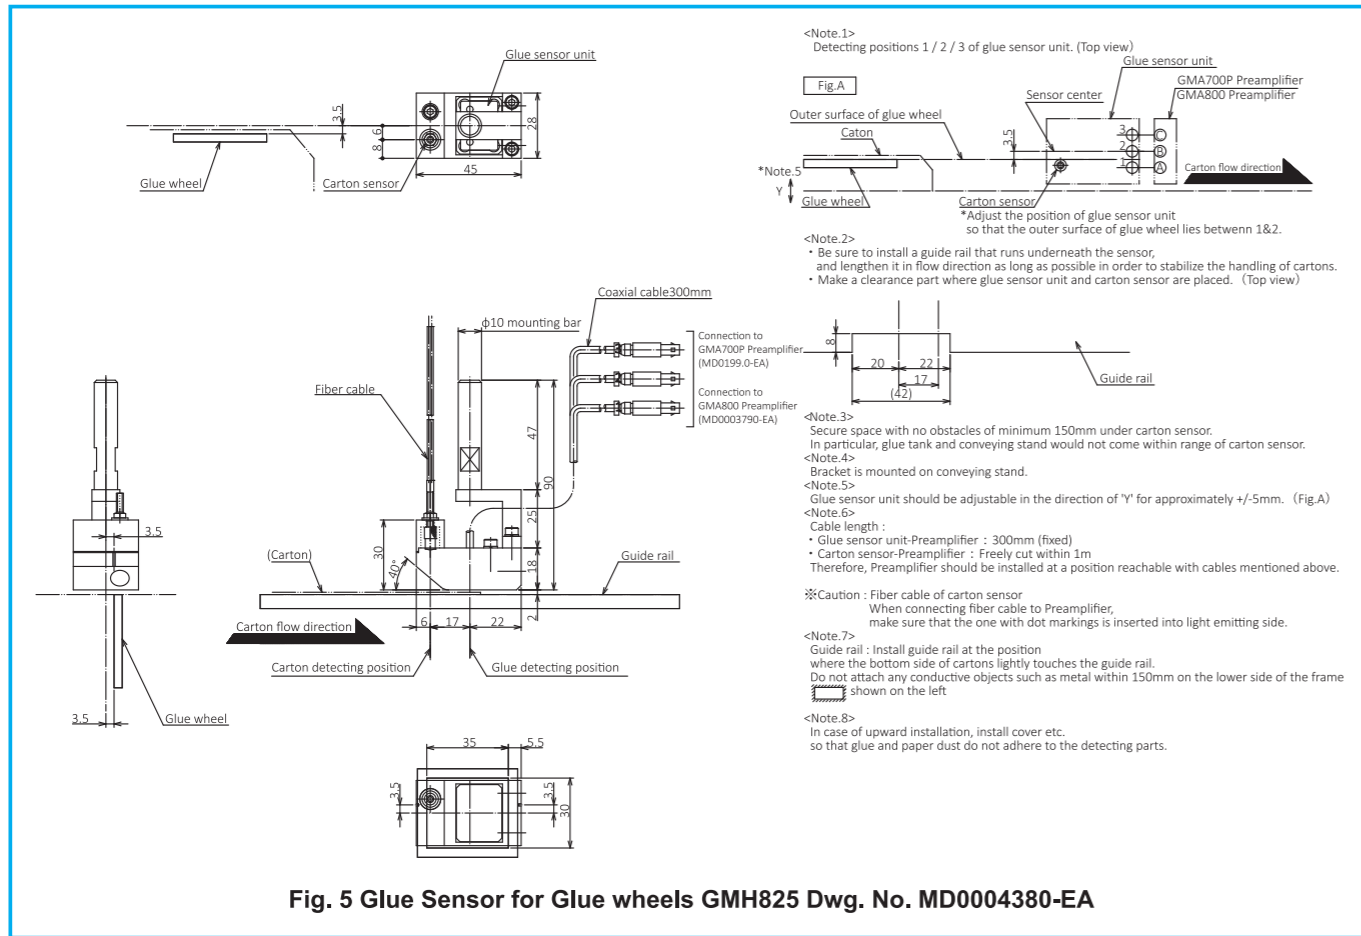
Glue Sensor for Glue wheels GMH825 Dwg. No. MD0004380-EA
